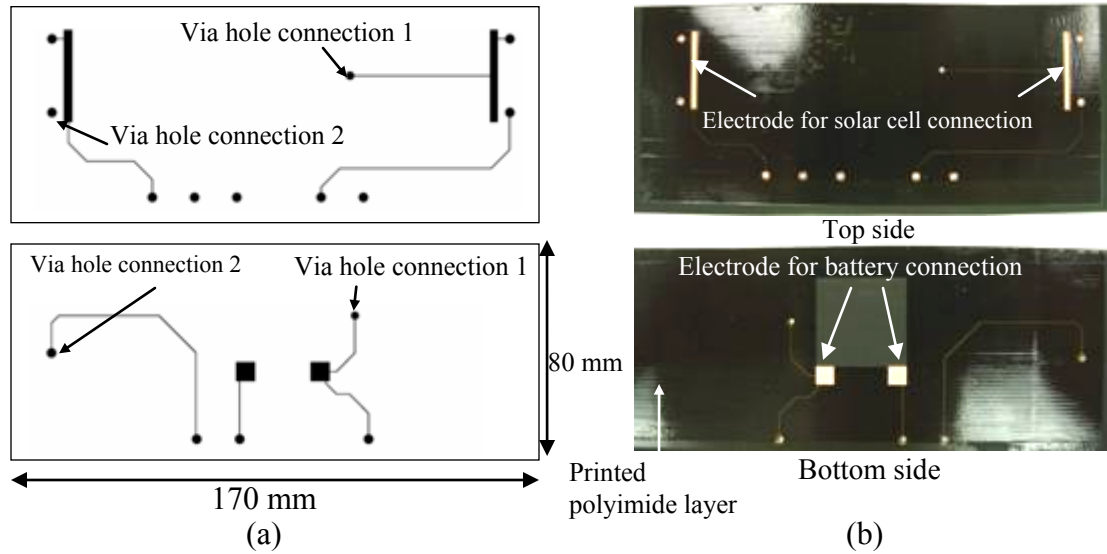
The printed electrode for integration: (a) drawing and (b) printed electronic circuit for integration.
